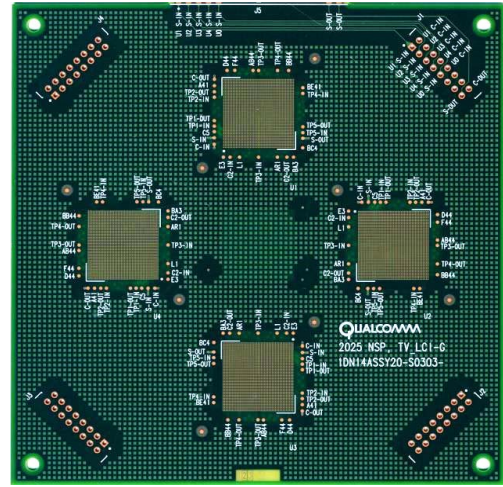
Drop-test board design for 18.5 mm \times 18.5 mm packages [17].
